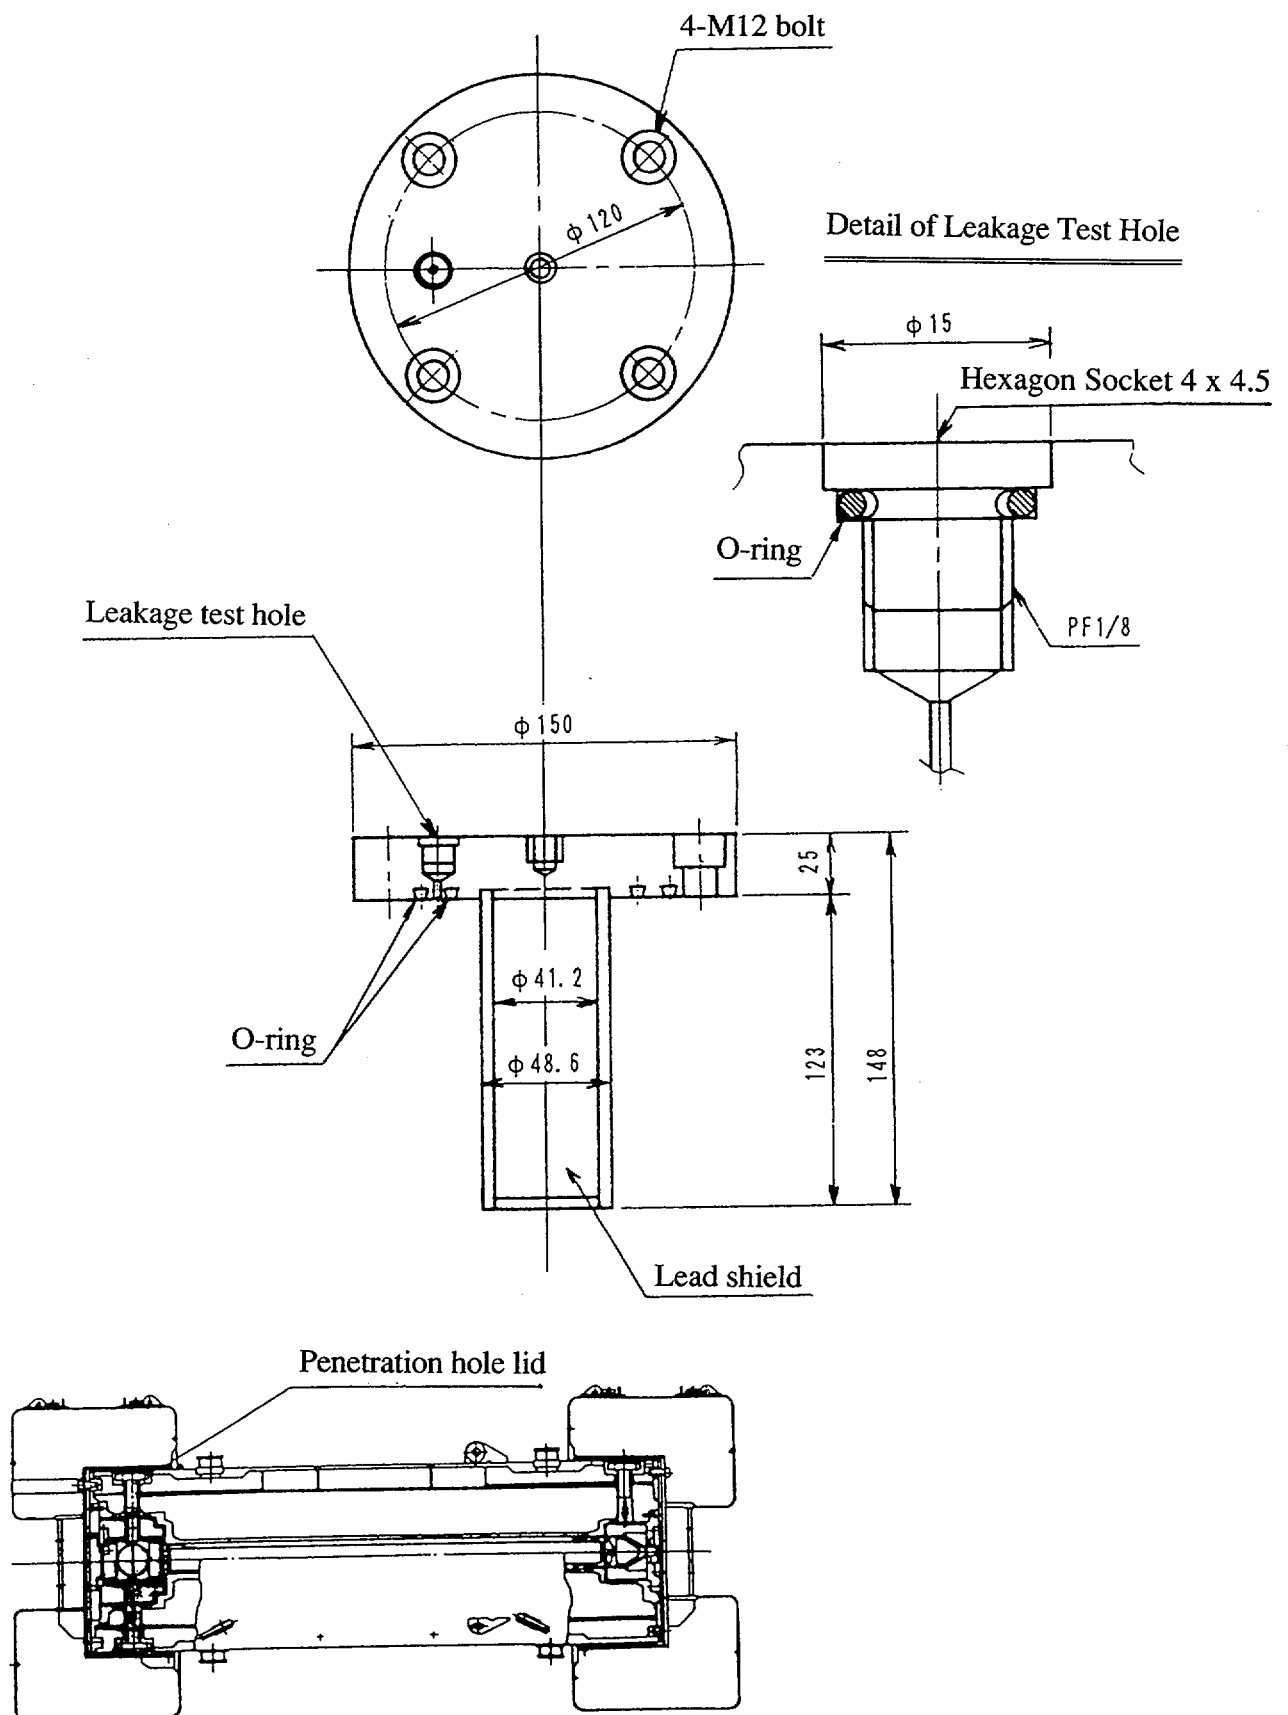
Penetration Hole Lid for Rotating Plug (in mm)
